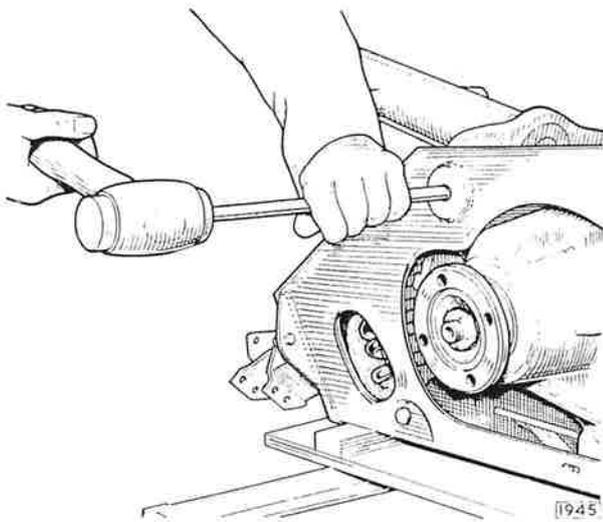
Drifting the inner fulcrum shaft into position and displacing the dummy shafts
